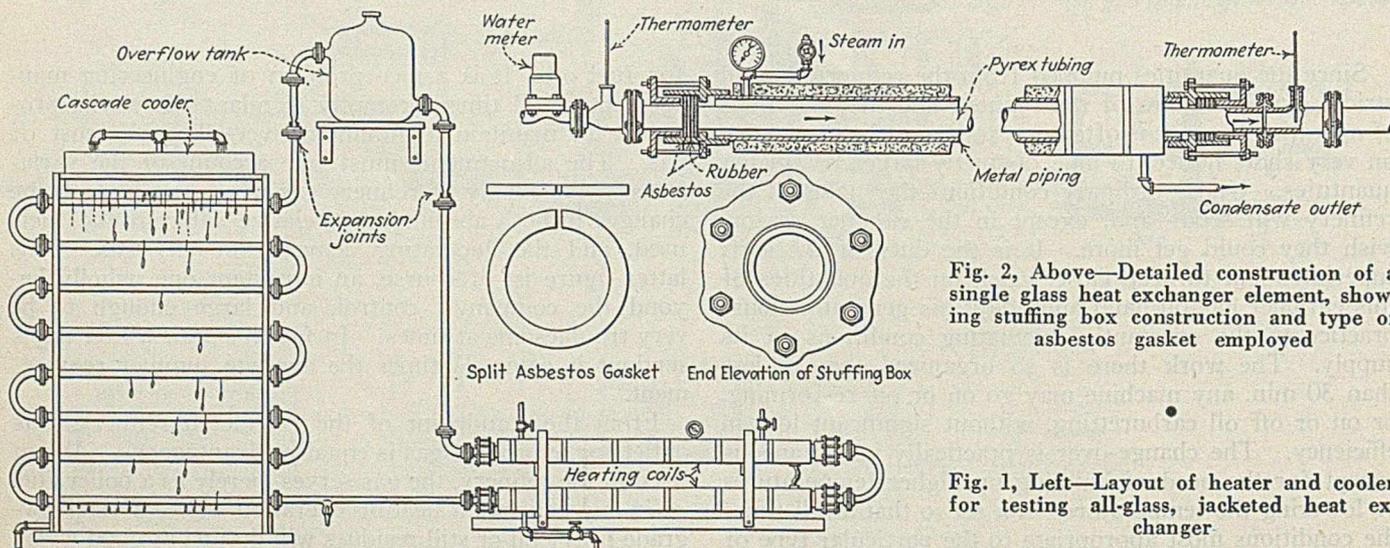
, Above—Detailed construction of a single glass heat exchanger element, showing stuffing box construction and type of asbestos gasket employed
